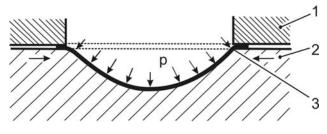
Example hydrostatic cupping with the modifying flange position: 1. Restraint Flange, 2. Mold, 3. Semi-sheet.
